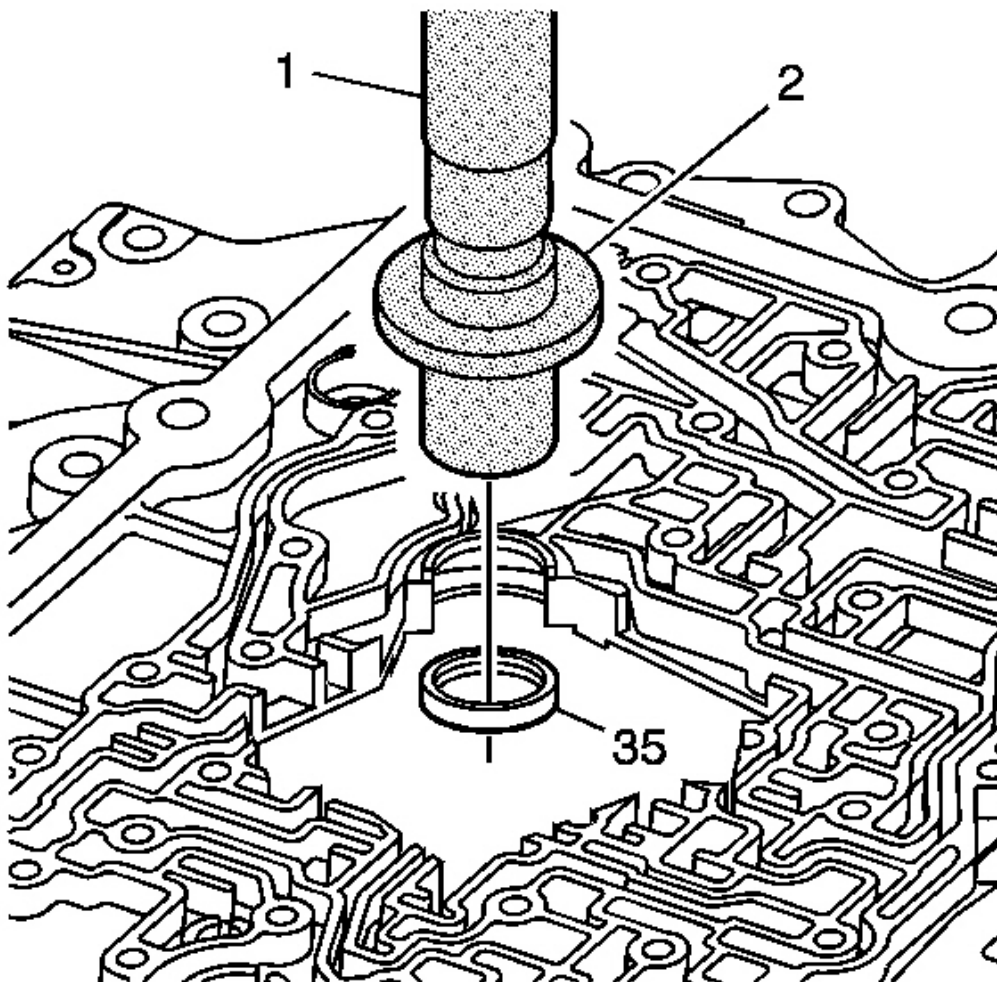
Removing The Case Cover To Turbine Shaft Seal Using J 7079-2 & J 39062
